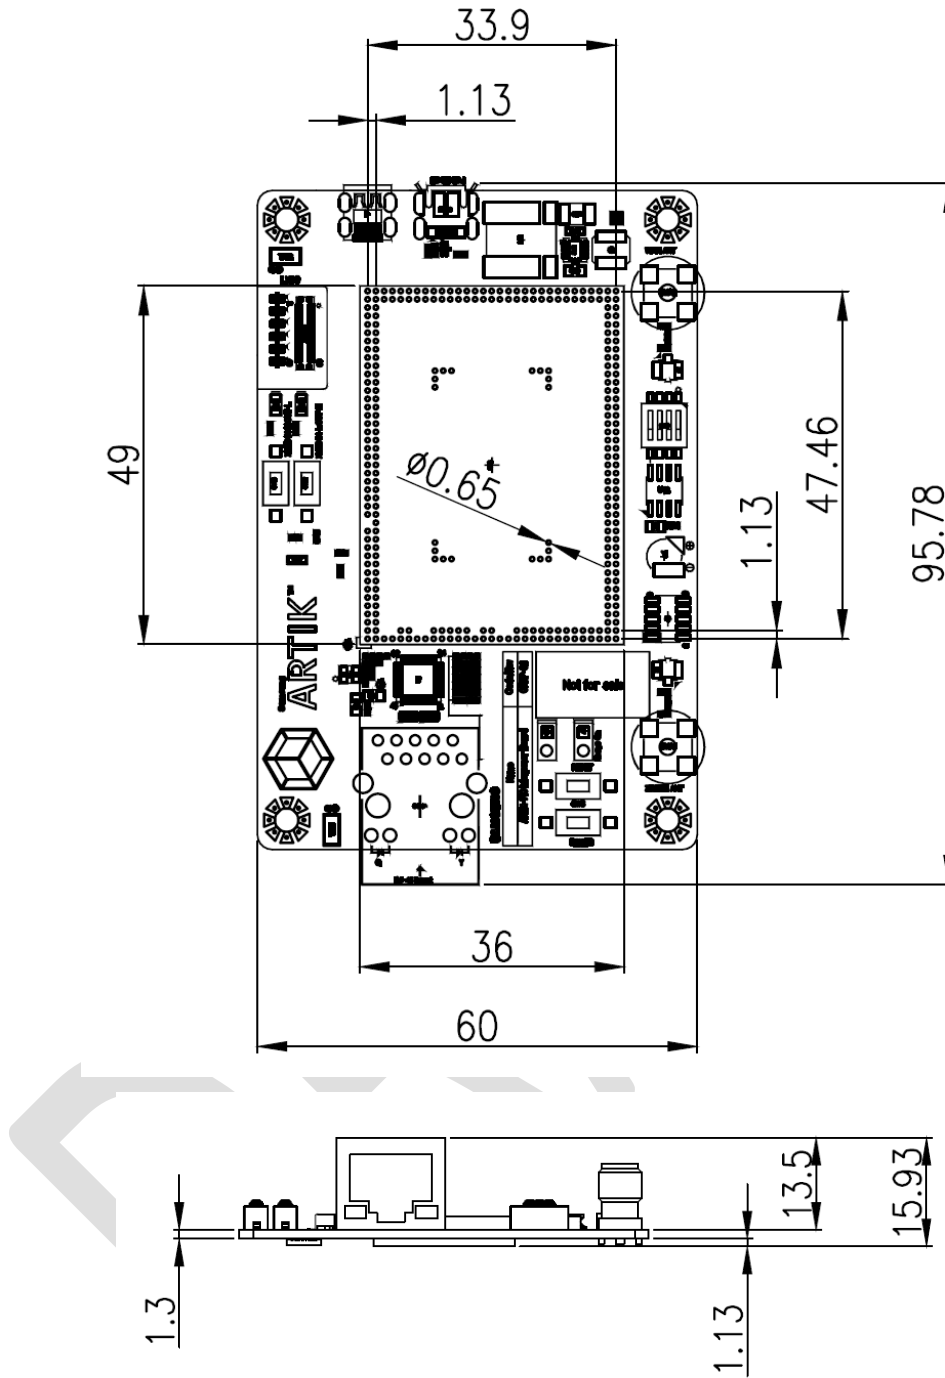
Mechanical Drawing ARTIK 530 Development Board Interposer Board all dimensions are in [mm]
